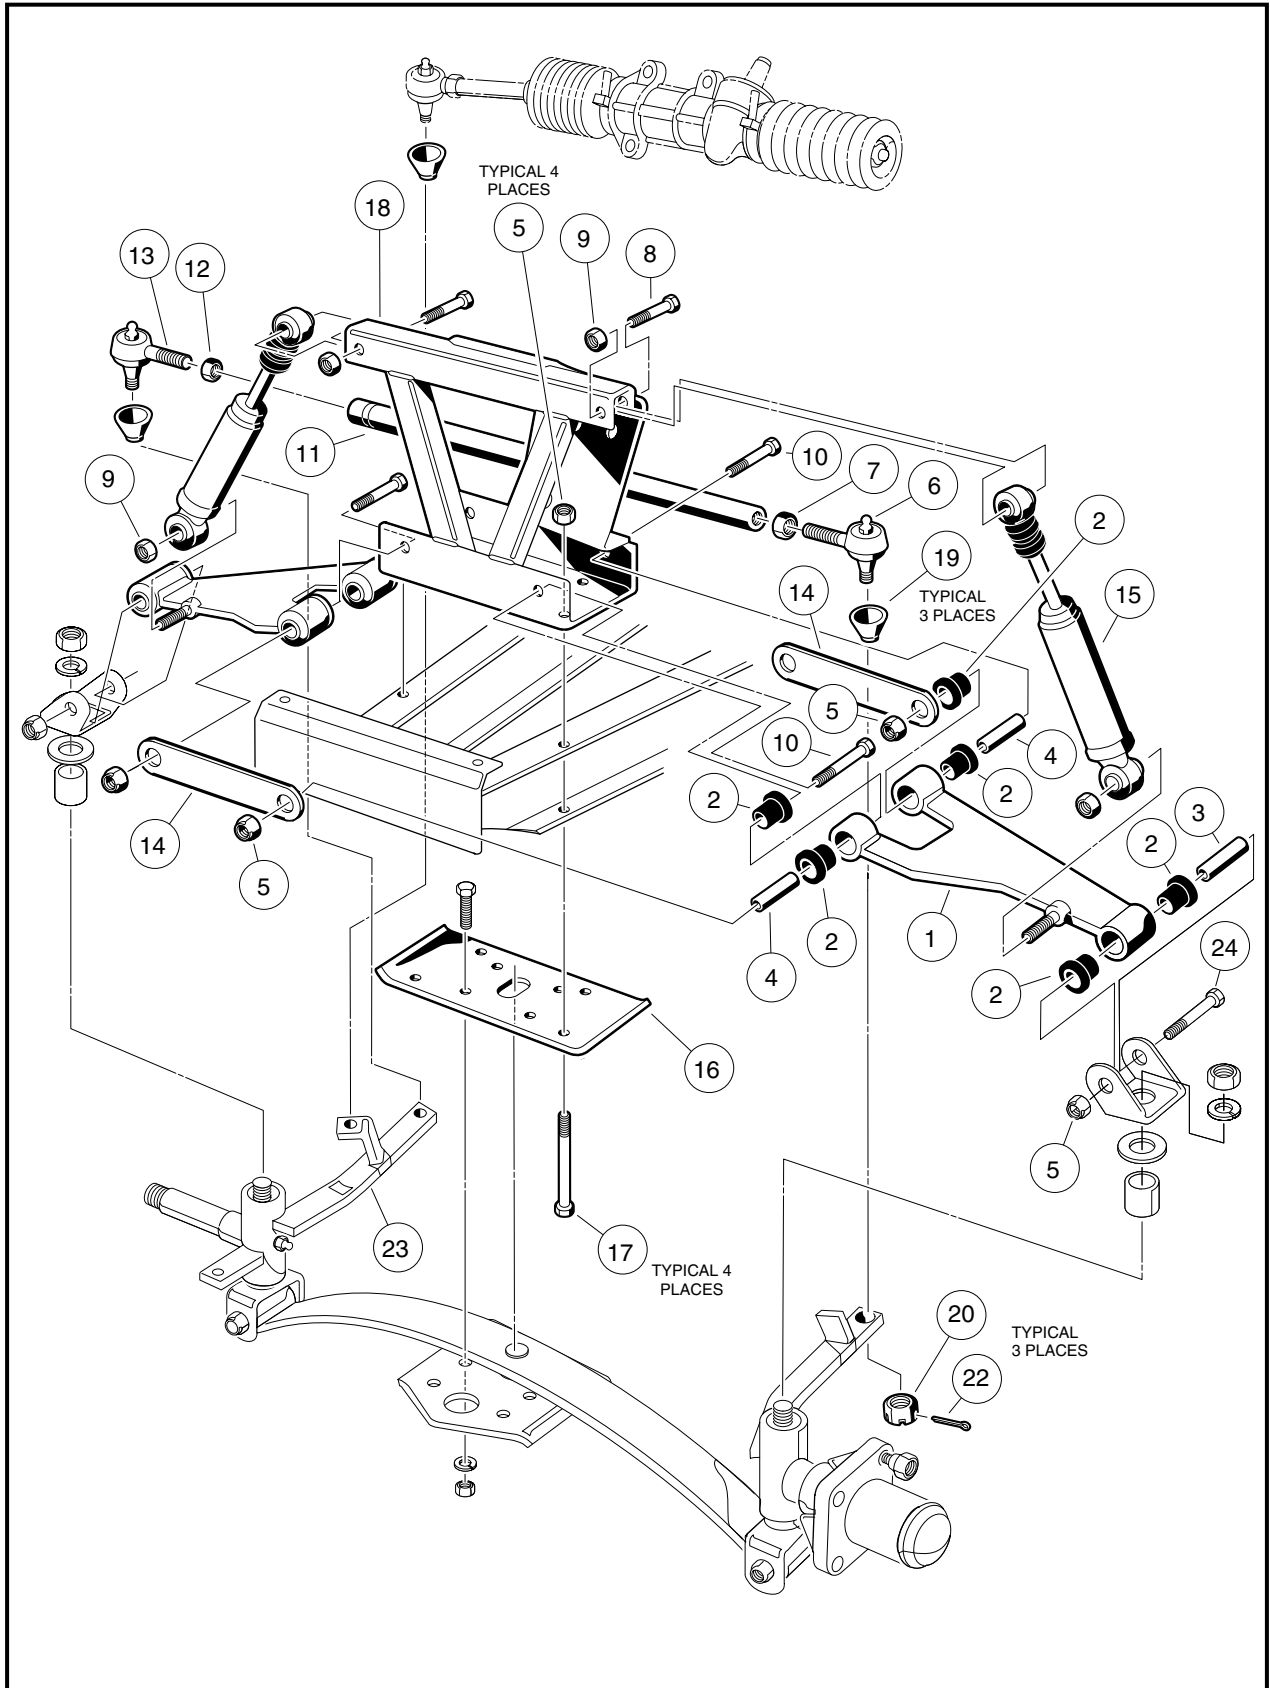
Two-Wheel Brake Vehicle – Upper Portion
